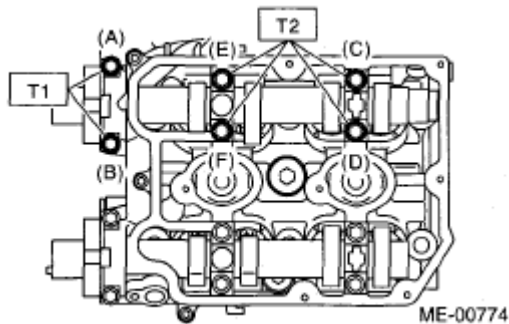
Identifying Camshaft Bearing Caps Bolts
